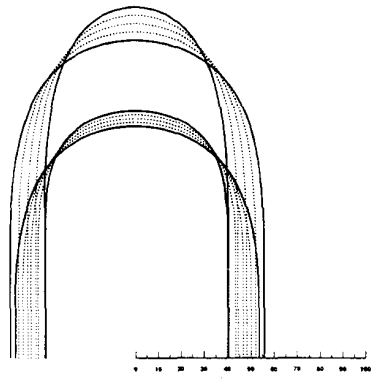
Polygons for endspacer machining with 5 axis milling machine for dipole model magnet.
